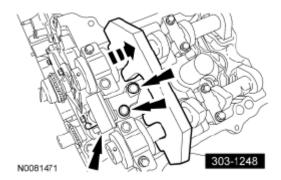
Locating Lockpin Courtesy of FORD MOTOR CO.
